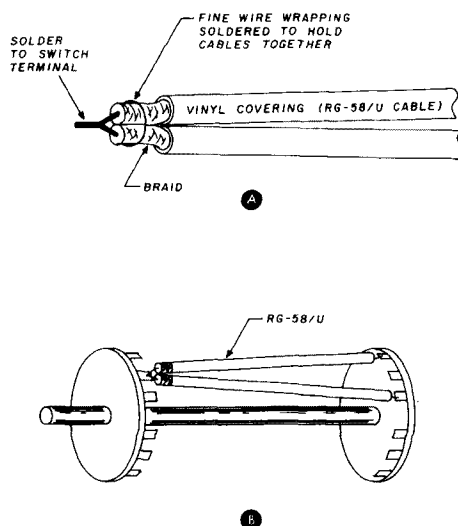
Method for mounting coax cable to rotary-switch segments. Sketch A shows how to secure the cable ends. Sketch B is an example of the coax-cable segment in (A) mounted to a two-gang ceramic rotary switch.
